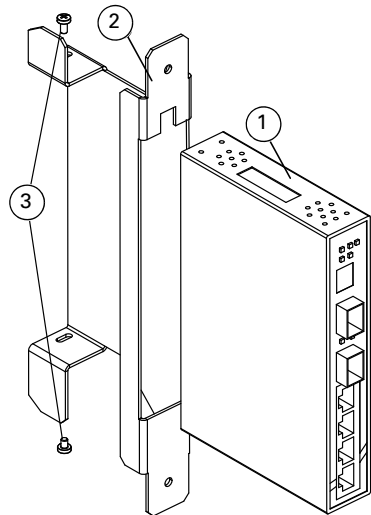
Mounting the Ethernet switch to the slot cage holder
